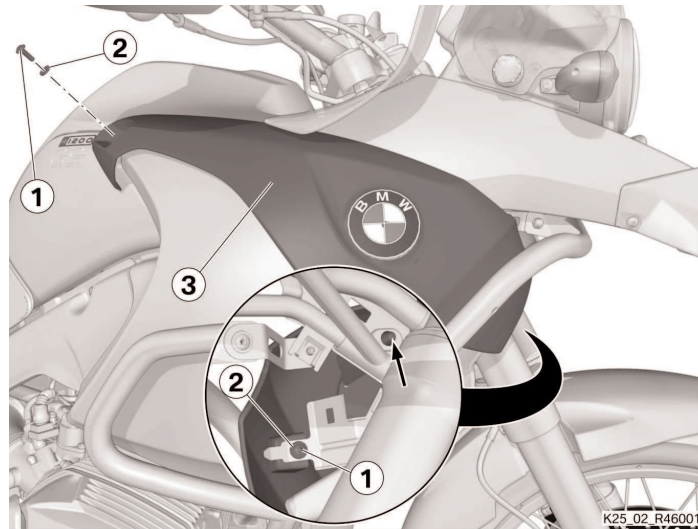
Construction status 2 with new threaded fastener of the fuel-tank mount (bolted through from outside to inside) - no thread-locking compound required.
